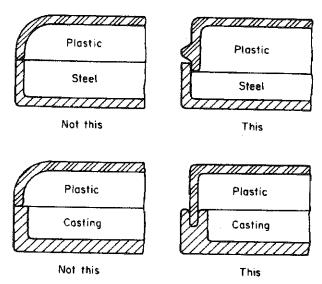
Lips and locating bosses aid in alignment when plastic parts are assembled.
